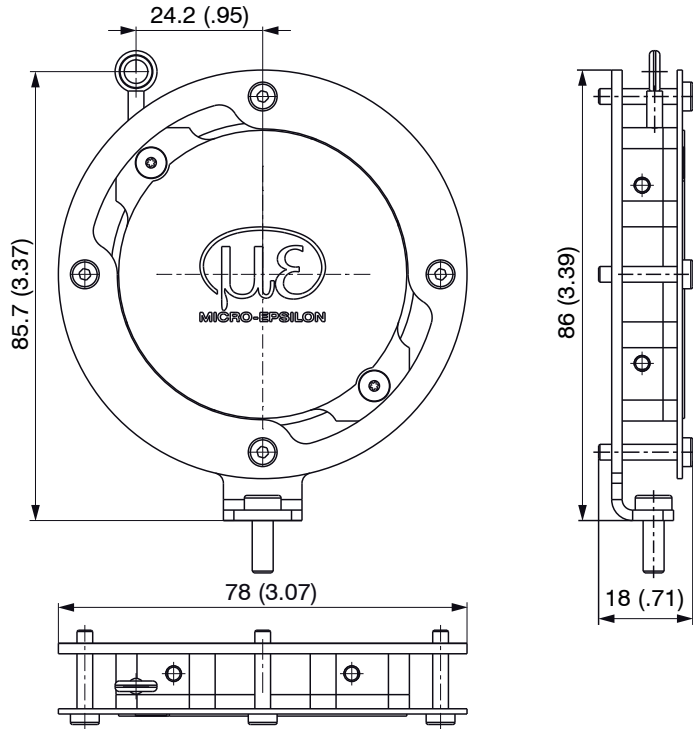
Dimensional drawing of WDS-MB56 mounting bracket set - side view, dimensions in mm, not to scale
